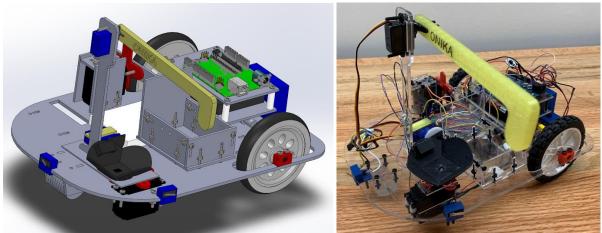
Front Left View of SolidWorks Model and Photograph of Milestone 3 Robot
